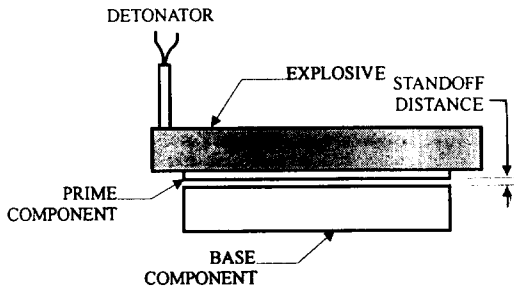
Typical Component Arrangement for Explosion Welding
